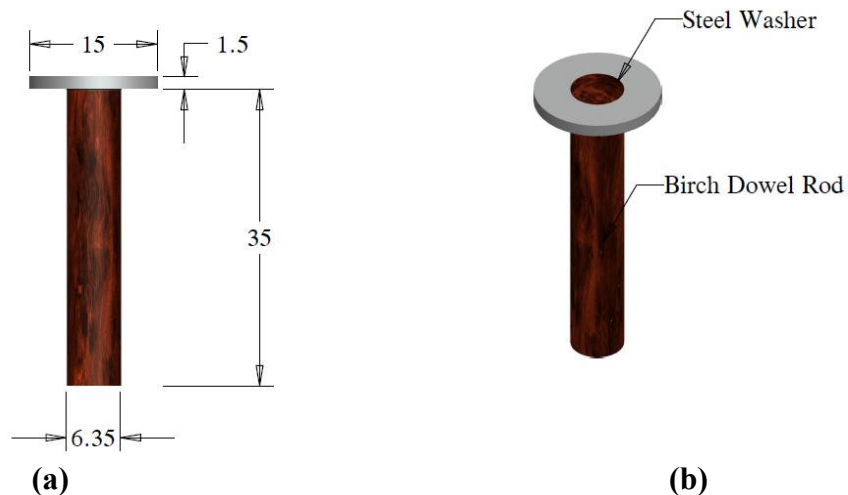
Rotor shaft drawing with dimensions in [mm]. (a) Front view (b) Isometric view
